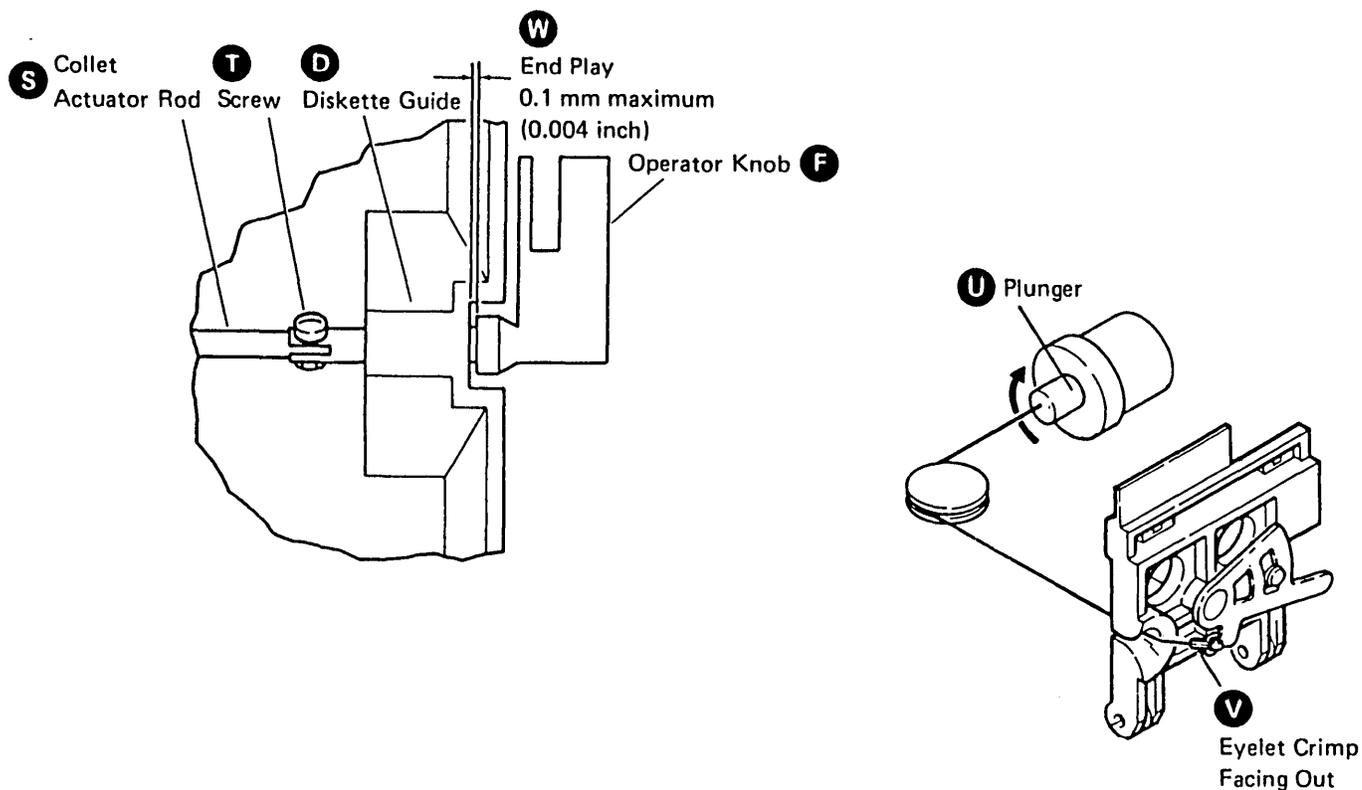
(Part 2 of 2). Collet/Flat Spring Removal
